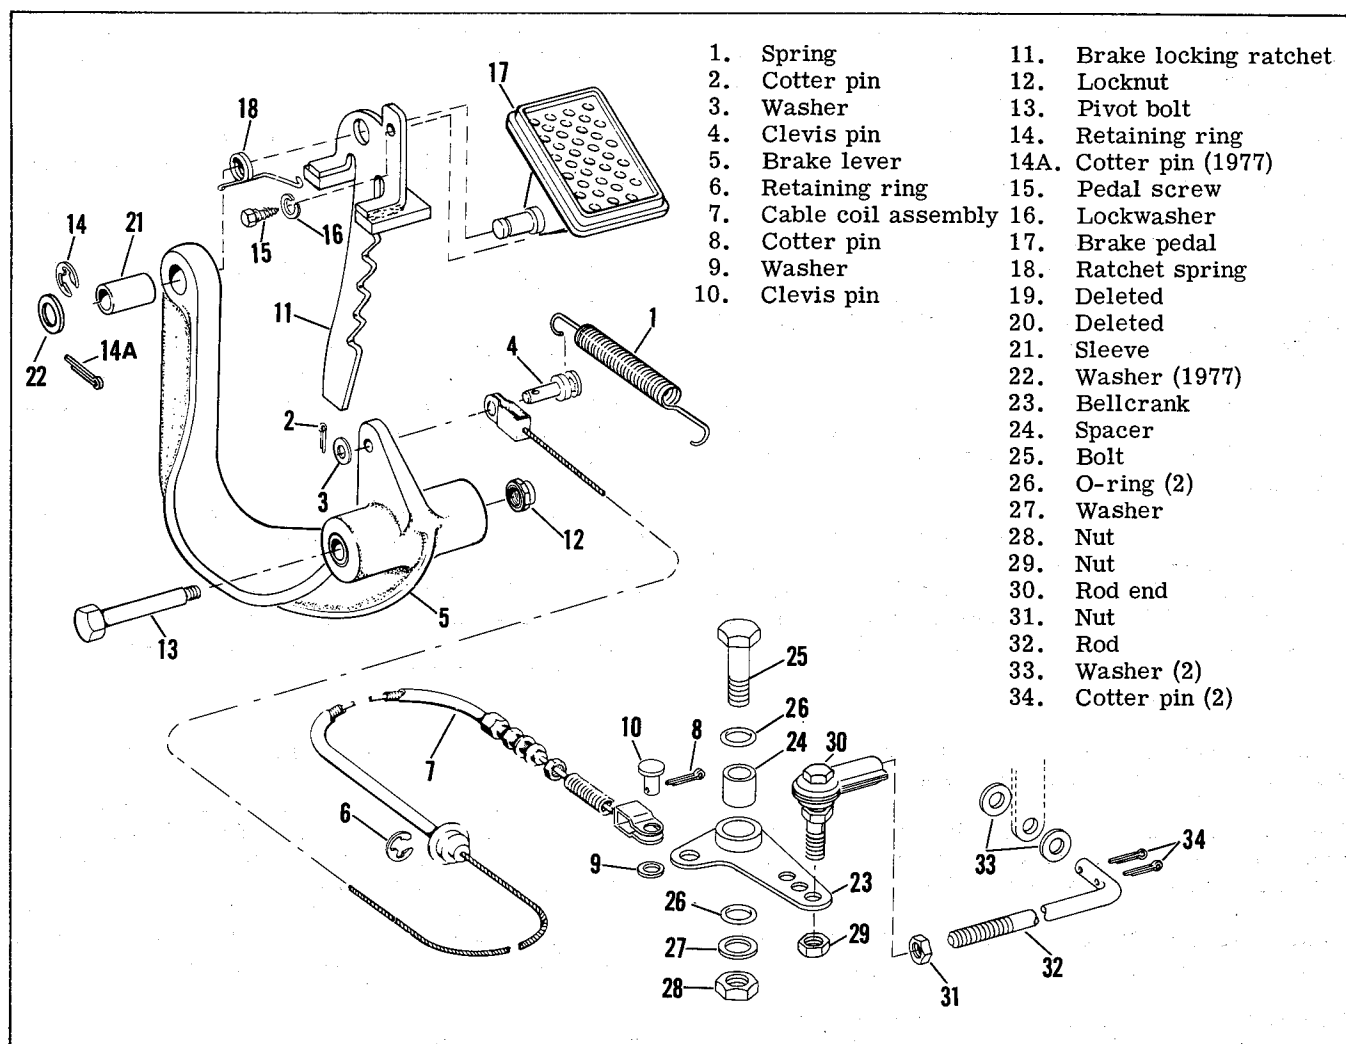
Brake Pedal and Cable Assembly - Exploded View
